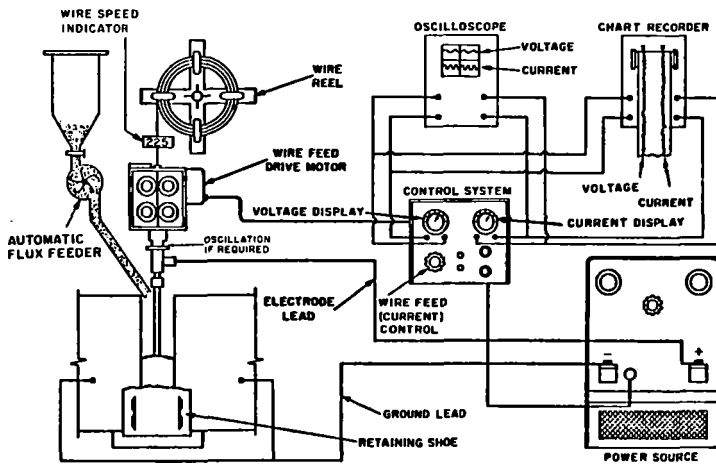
Schematic Diagram of Electroslag Welding Components
